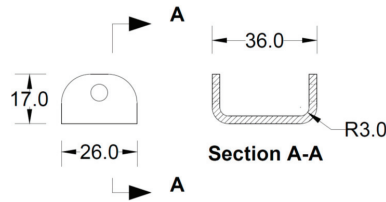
Details of secondary lock channel (all dimensions are in mm, steel plate gauge 12).
